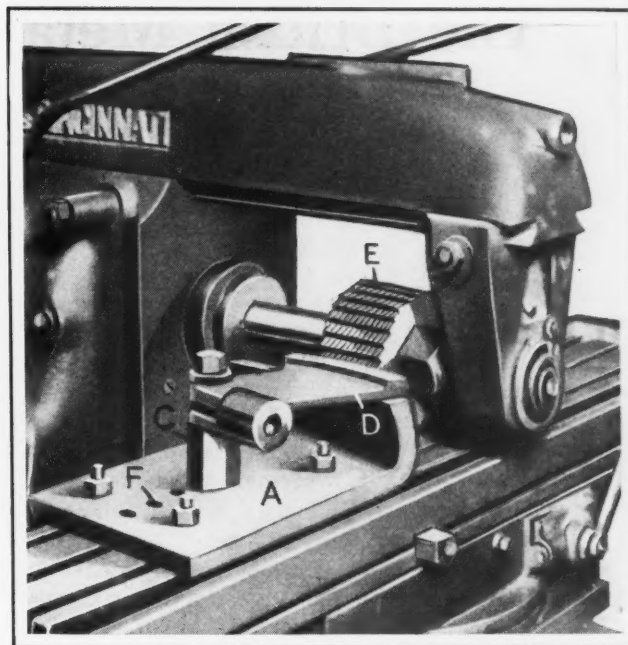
Diagram Showing Arrangement of Radius-turning Fixture
